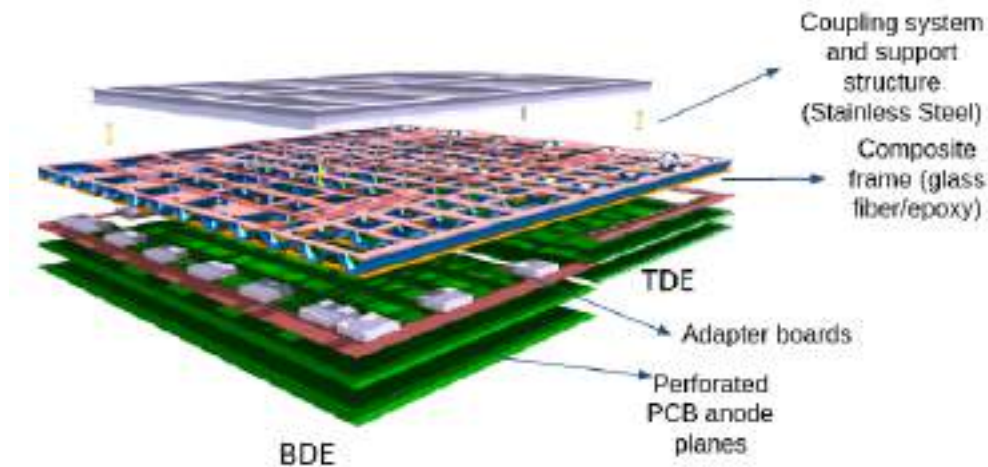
3D model of the first full-scale CRP that was tested in the cold box. Perforated PCB anodes, adapter boards, composite frame and support structures are shown in exploded view. This CRP had a hybrid setup in which both readout electronics designs (BDE and TDE) were integrated.
